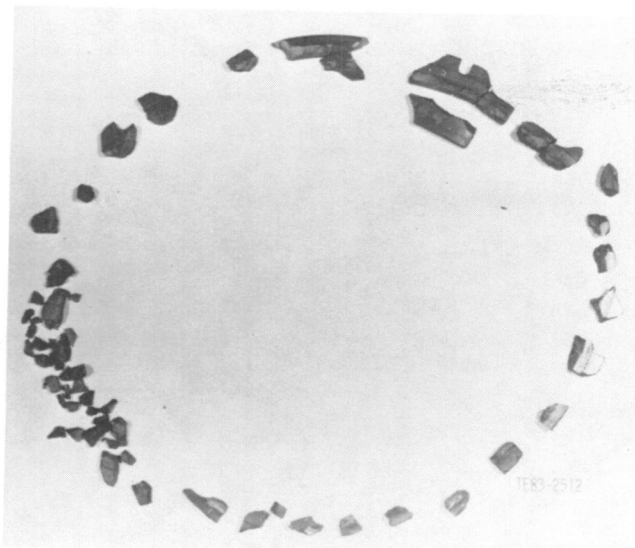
Remaining piece of shroud ring after disassembly of engine C-4, TD13.
